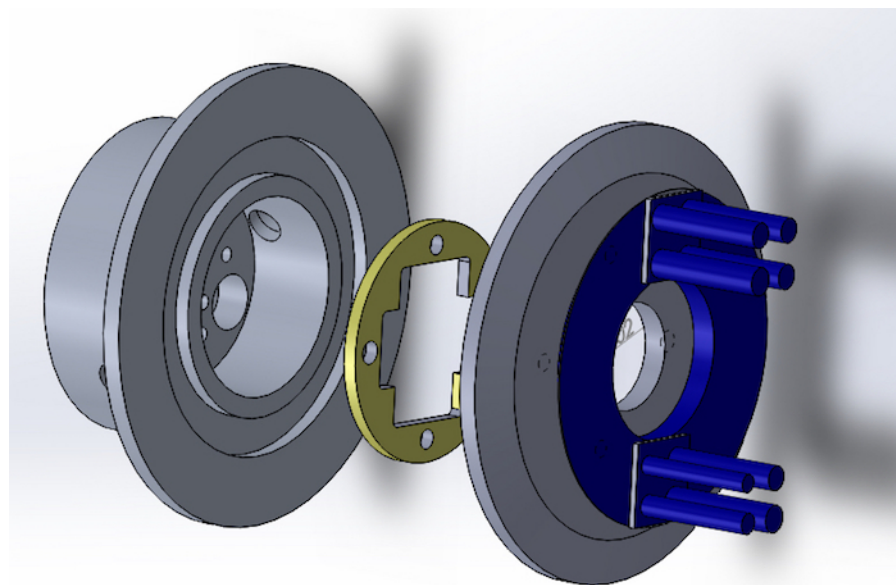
An exploded view of the chamber with cooling. This panel shows an exploded view of a test chamber assembly with a cooling ring and the heat sink placement shown in blue. Note that for an optimal performance, the rod heat sinks should be placed all around the diameter of the ring, not just the two shown here for clarity. [Please click here to view a larger version of this figure.](#)
